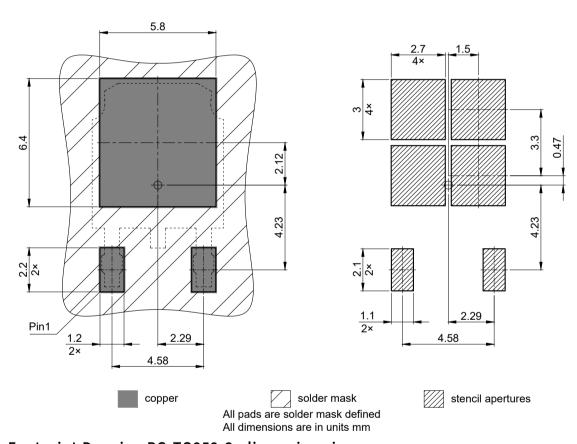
Footprint Drawing PG-TO252-3, dimensions in mm
